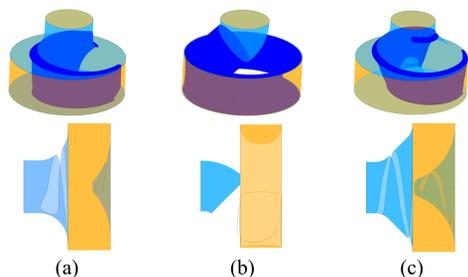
Solid model of one channel pump impeller: (a) impeller No. 1, (b) impeller No. 2, (c) impeller No. 3.
